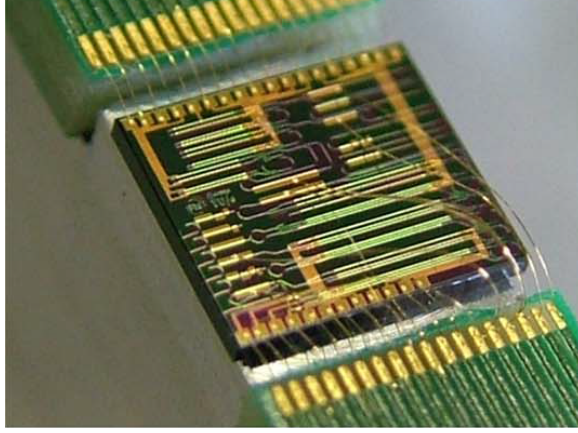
Fabricated chip mounted on an aluminum evaluation platform and wirebonded to printed circuit boards for easier electrical contact. [1]
